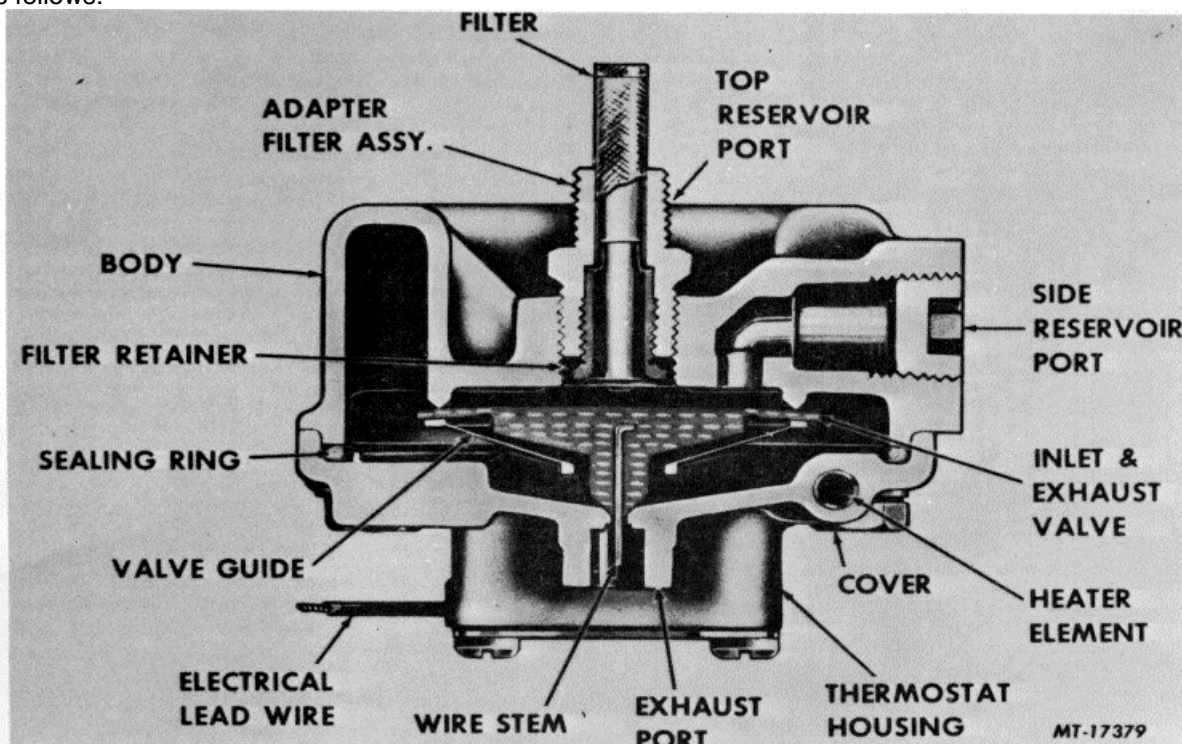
Sectional View of Automatic Reservoir Drain Valve
